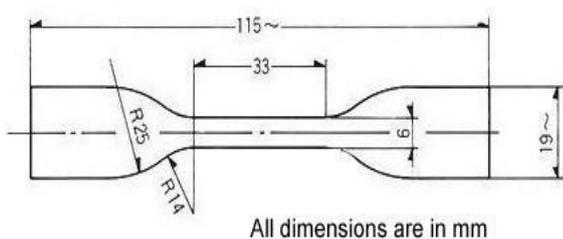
ASTM – D638 Type IV Tensile Test Specimen Details [30]
